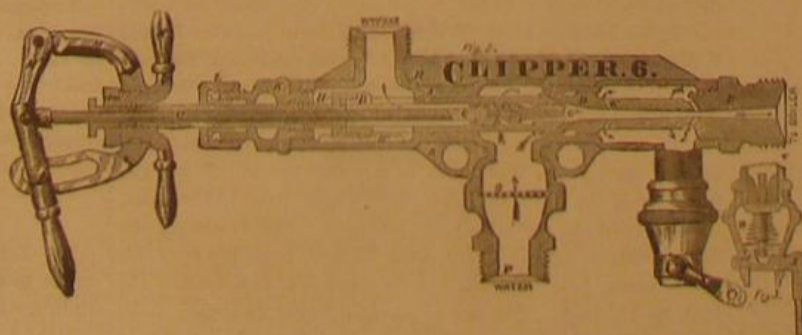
LONGITUDINAL SECTION OF INJECTOR.
